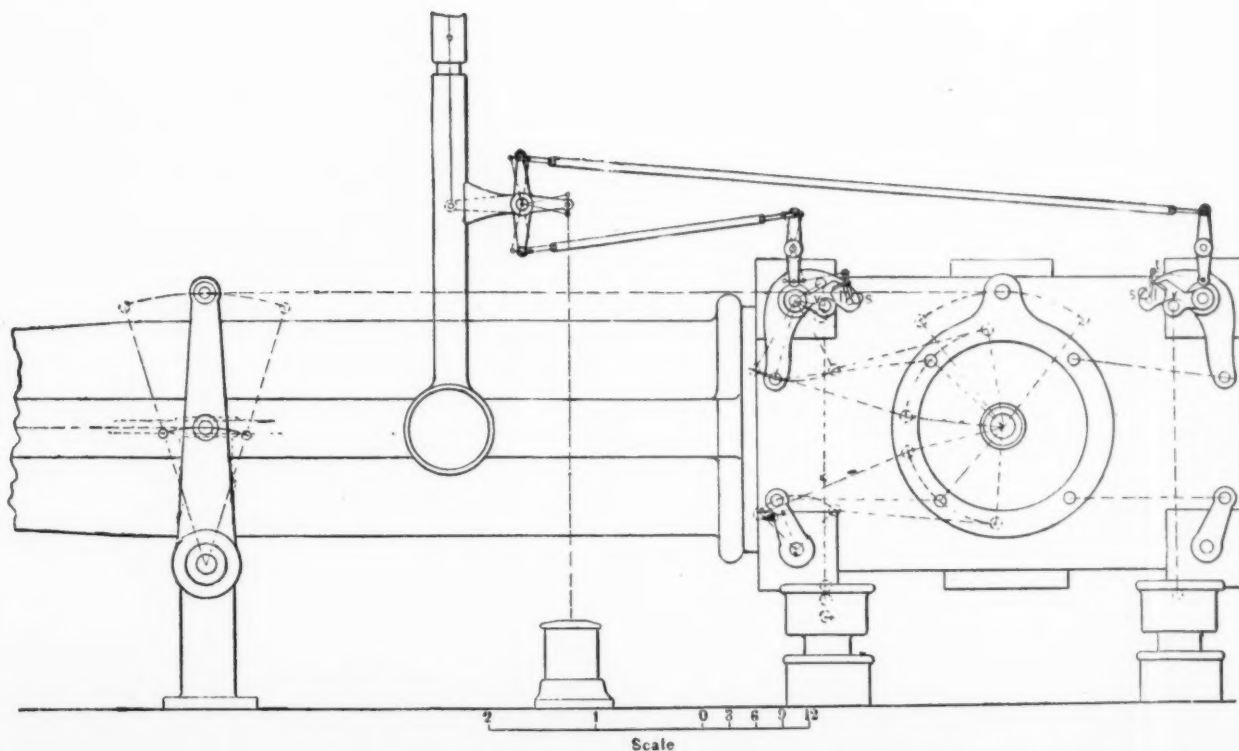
ELEVATION OF CORLISS MILL ENGINE.
